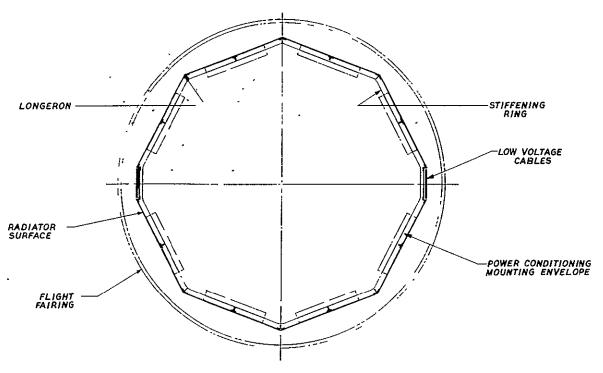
Power Conditioning Radiator Cross-Sectional View, Externally Fueled Reactor/Spacecraft
